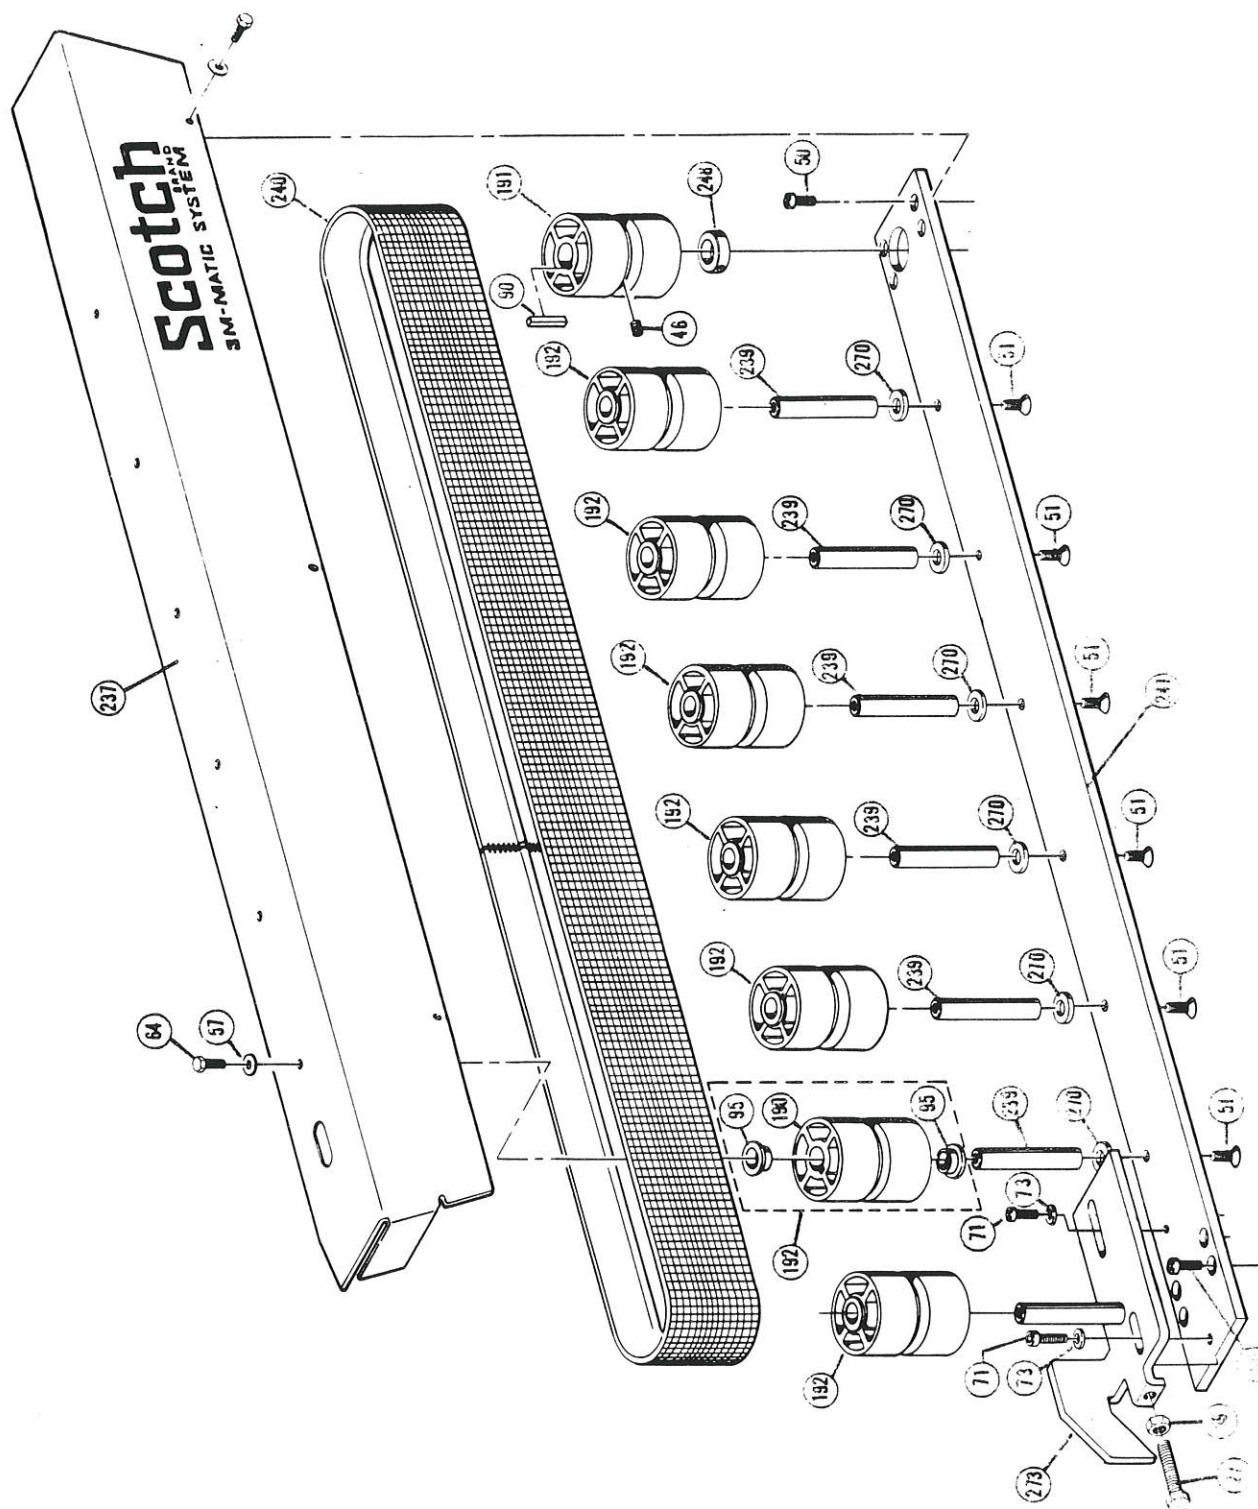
RIGHT SIDE BELT DRIVE ASSEMBLY
